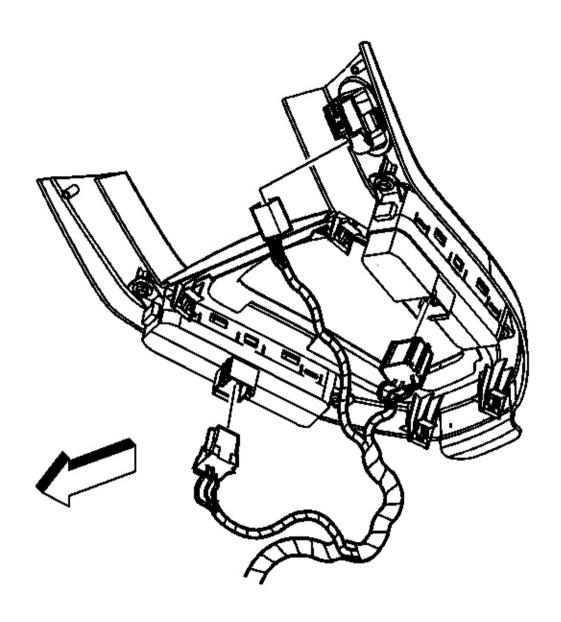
Electrical Connectors & Window Switch Trim Bezel Courtesy of GENERAL MOTORS CORP.
